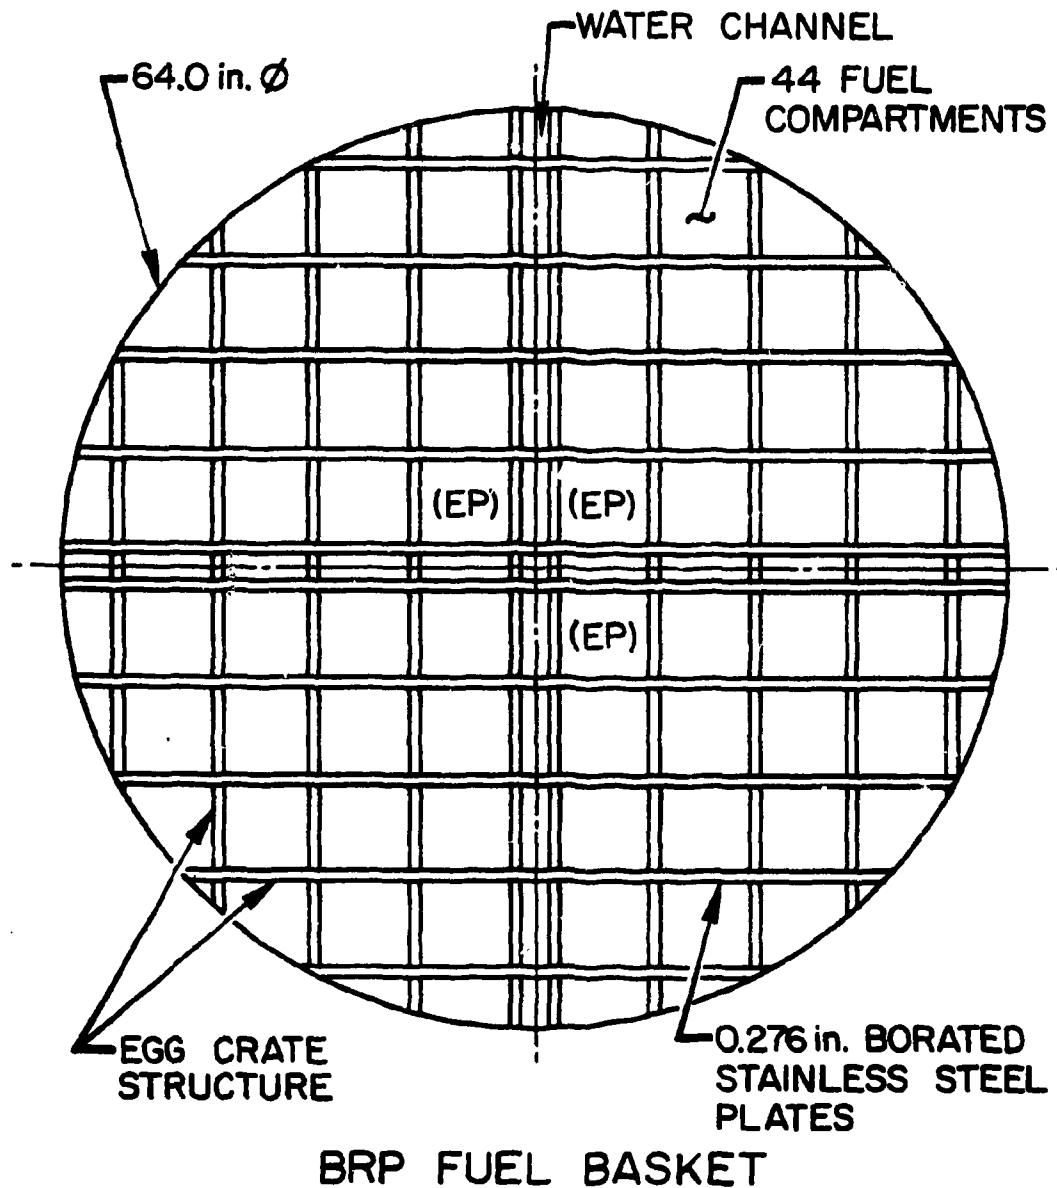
Locations of EP fuel assemblies for case BRP2 loading.
